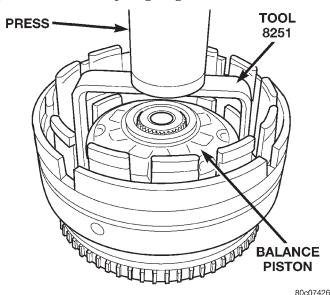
Compressing UD/OD Balance Piston Using Tool 8251
